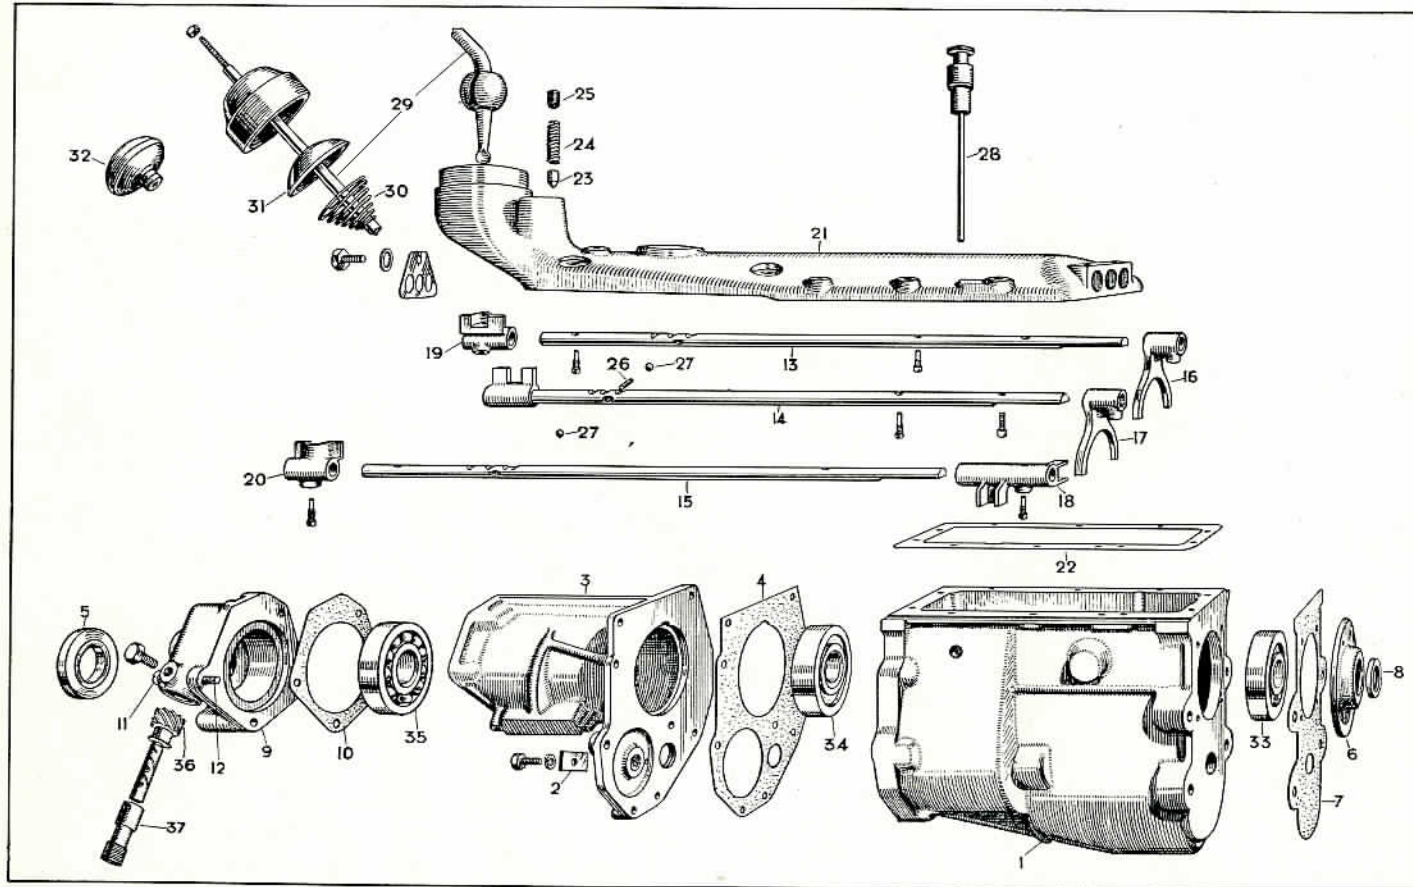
1 1/2 LITRE GEARBOX. CASE AND REMOTE CONTROL.
